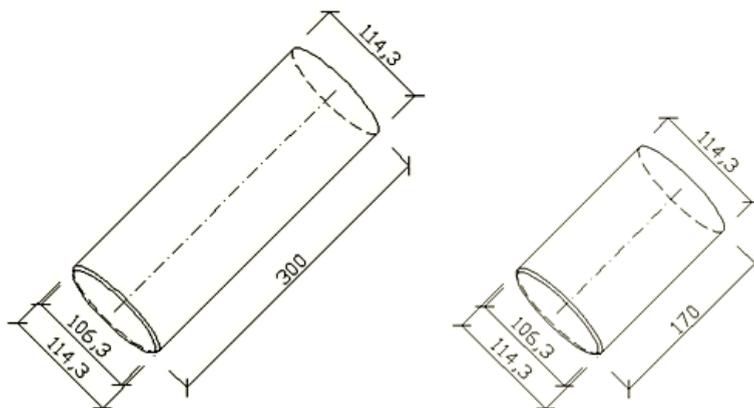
Sampling probes, big (left) and small (right), dimensions in mm
